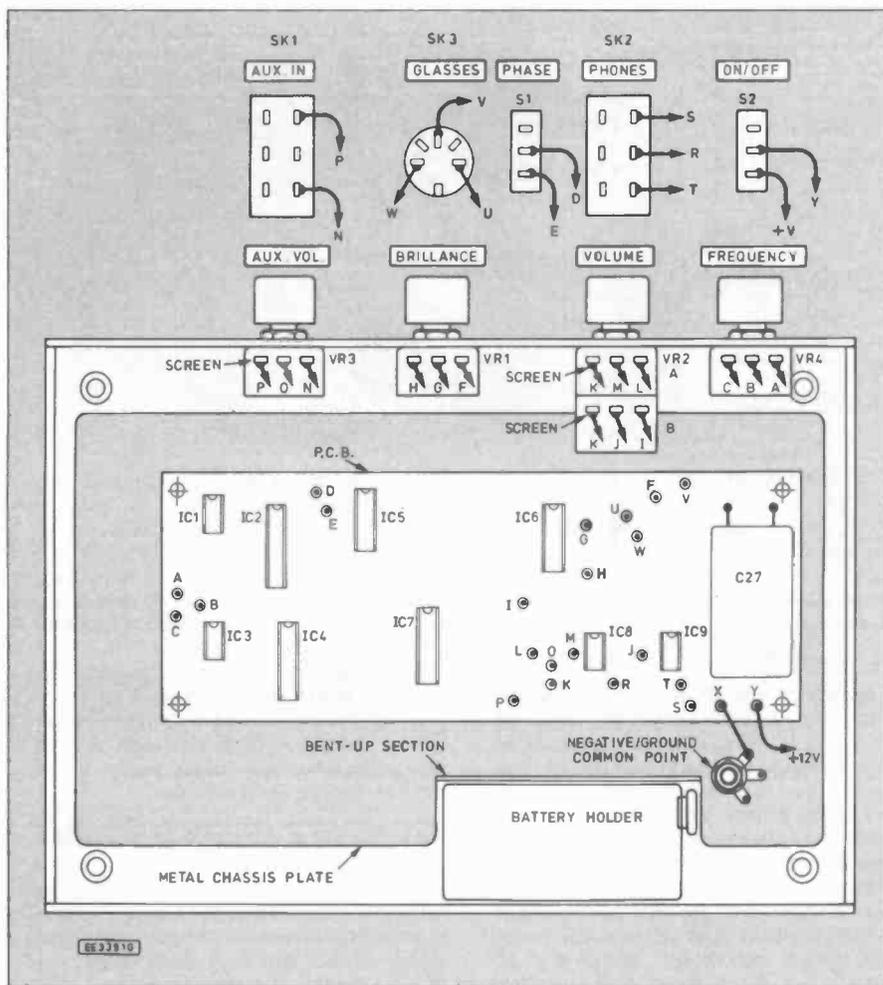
Interwiring of the front panel mounted components and the p.c.b. Only those sockets and controls that relate to this part are shown.
